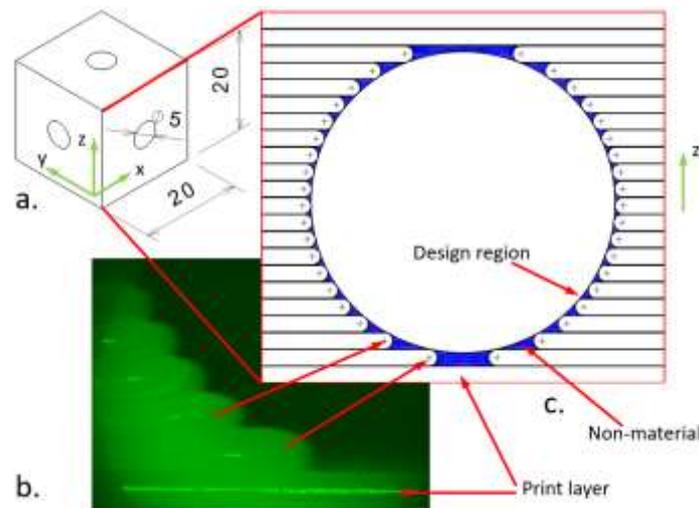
Model of vertical section of sample with printed layers; a. part design; b. printed sample; c. model develop
